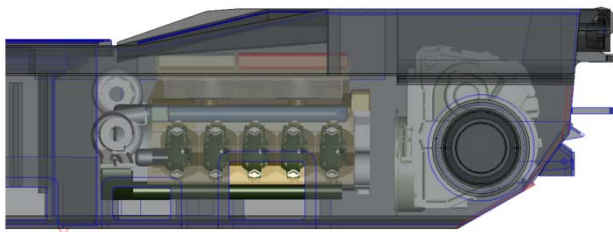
Boxer engine packaged inside a representative heavy weight vehicle platform.
